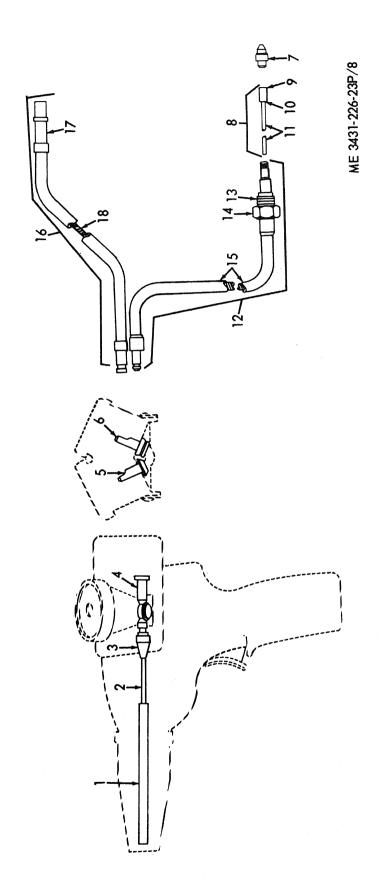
Wire Guide Fittings, Flexible Shaft and Casing Assembly.
